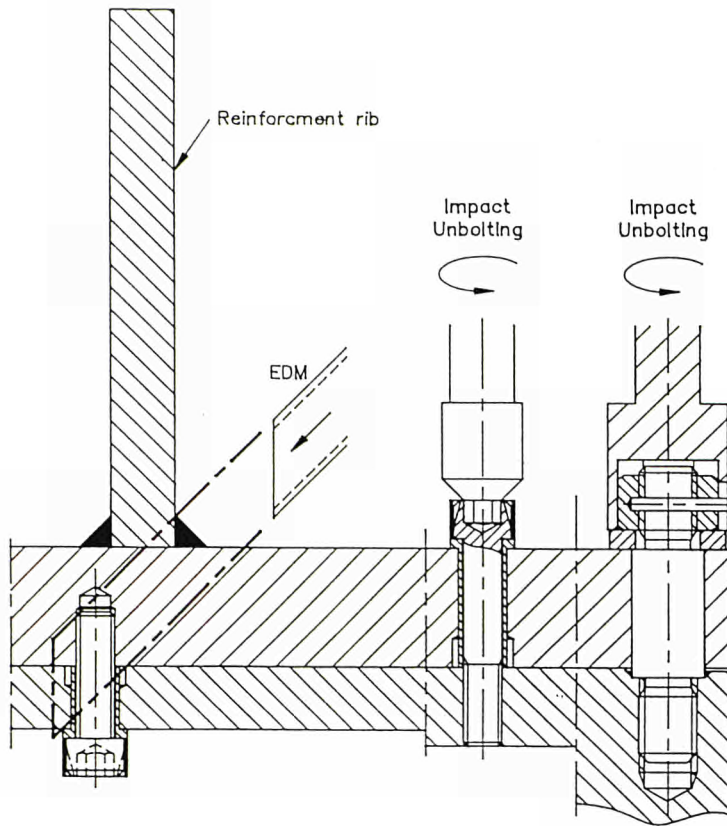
Summary of the different techniques tested for disassembling the "Rod shroud support plate"
